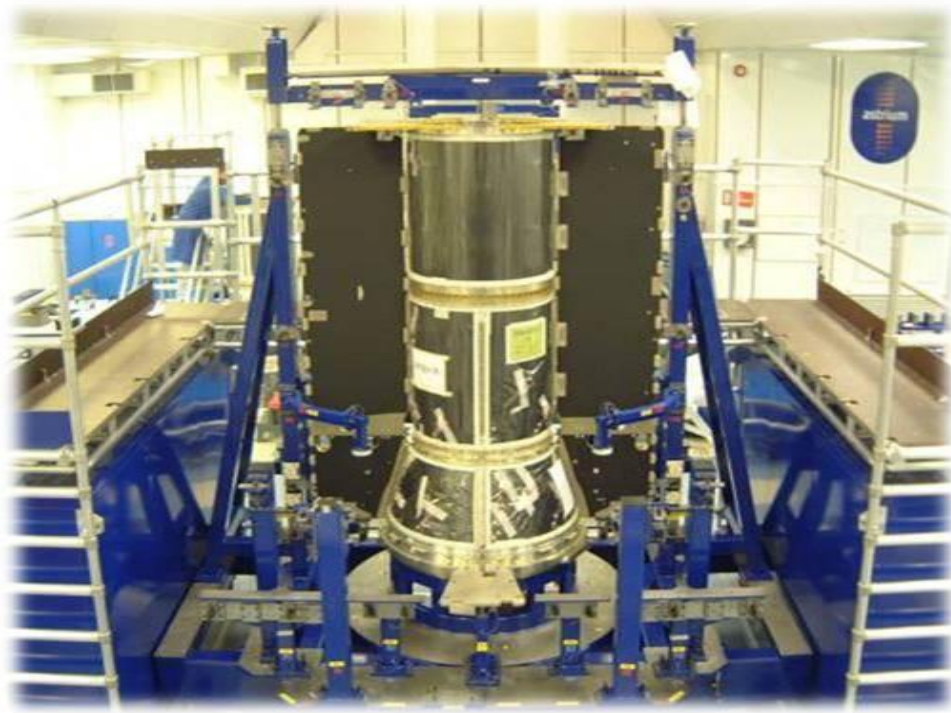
Service module Level 2 assembly jig, 2013 courtesy of Airbus Defence and Space, Stevenage.
